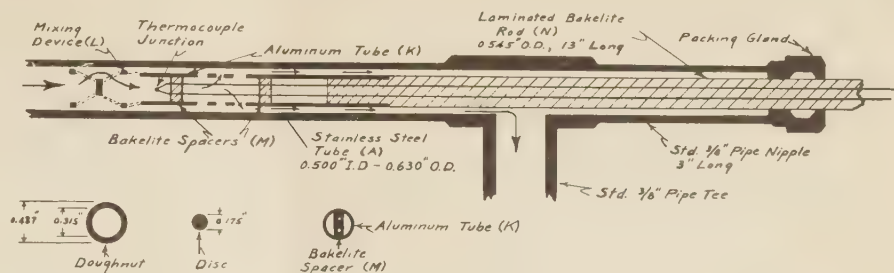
ASSEMBLY OF EXPERIMENTAL APPARATUS AT GAS-OUTLET END
